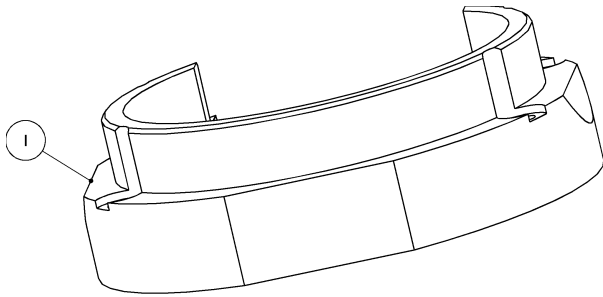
1901600: BLADE SHAFT ASSEMBLY
